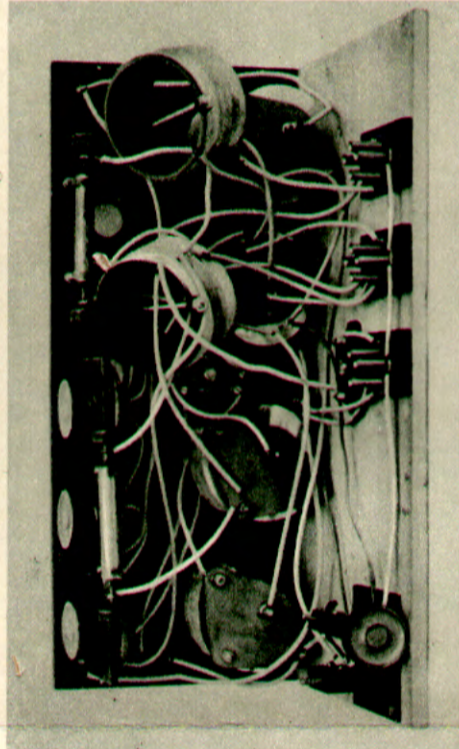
Back view of the completely wired set, illustrating the position occupied by the filament resistance panel
